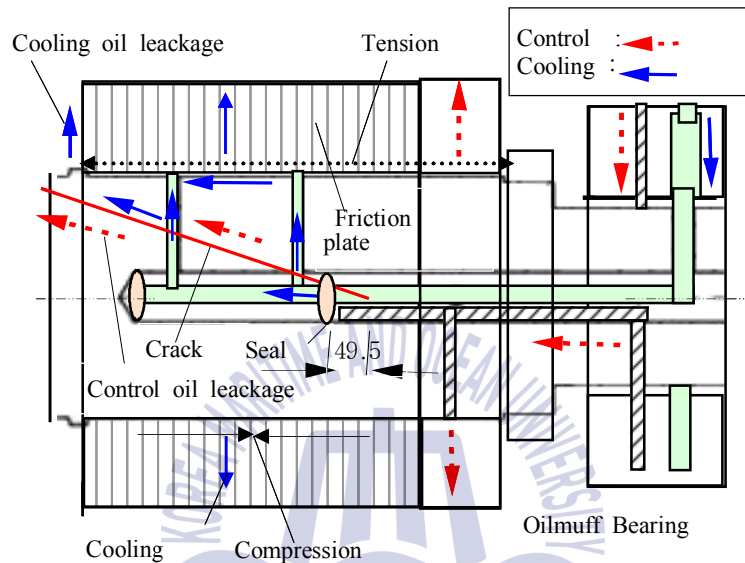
Extended stage leakage of cooling, lubricating and clutch control oil¹⁾
